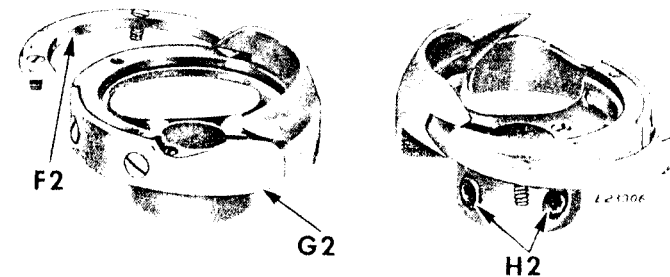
Sewing Hook Removed from Machine Showing Hook Washer
